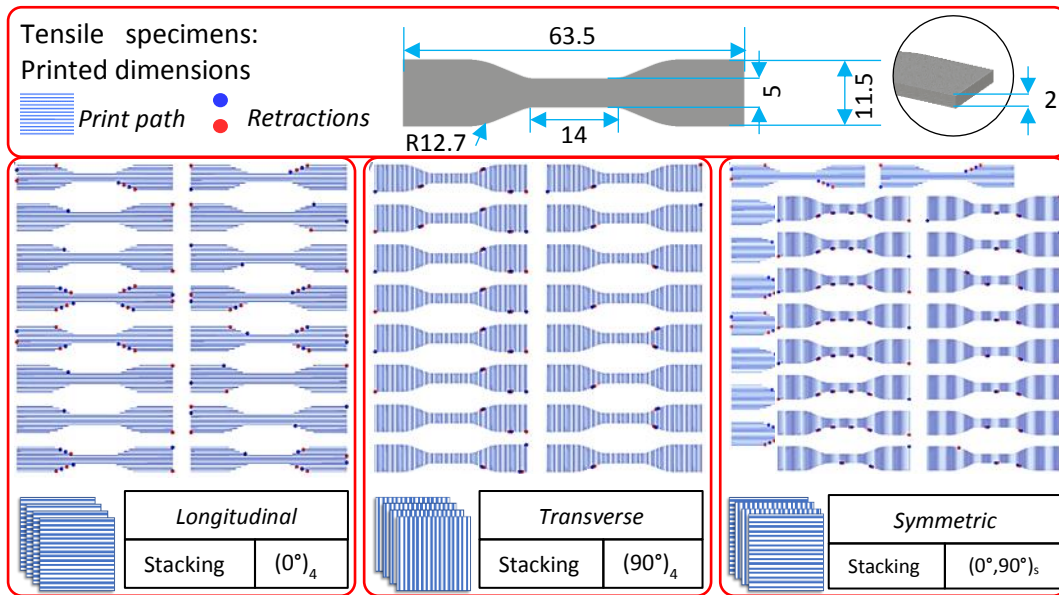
(top row) Test specimen dimensions as per ASTM D638 Type V (dimensions in mm). (bottom row) Print-path and stacking sequence of the samples fabricated for each set.
